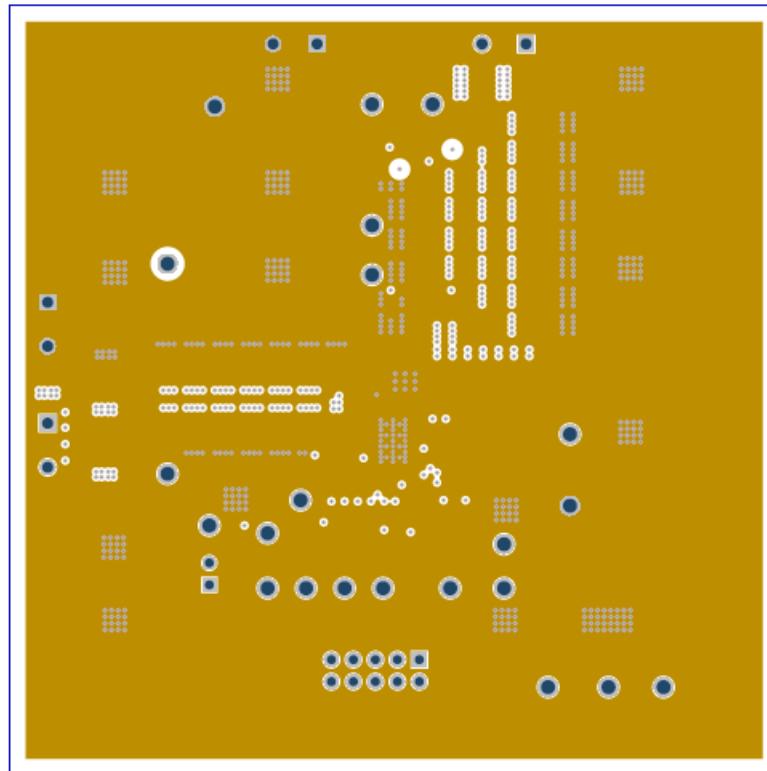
PWR-847EVM Inner Layer 1 (Top View)
